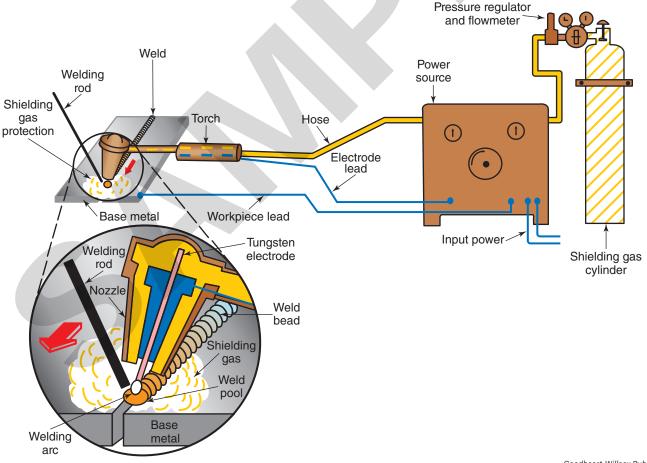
shows a typical station for gas tungsten arc welding. An AC-DC welding machine may be used with a regulated flow of a shielding gas, such as argon or helium. The shielding gas flows from a cylinder through a regulator, a flowmeter, and a hose to the GTAW torch.
